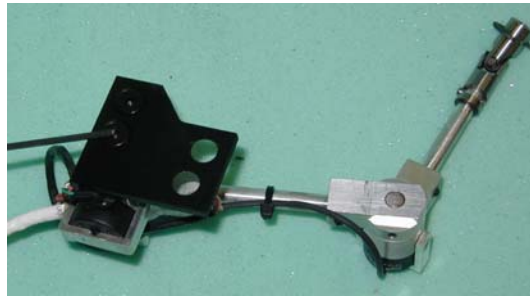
Lower Right Mounting Plate attached to Lower Right CRUX unit
